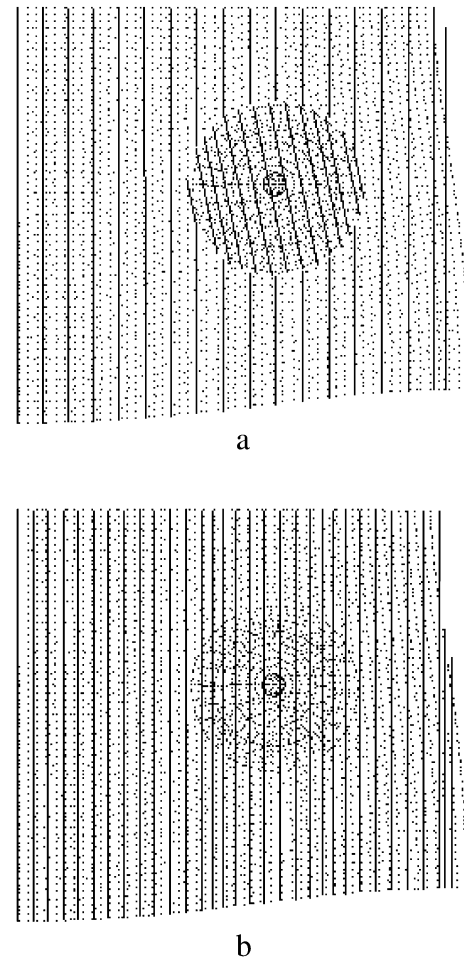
shows the generated tool paths for the two distinct machining areas. For the complex machining area within the elliptical boundary, the maximum gouge-free cutter size was calculated as 4.941 mm. From the standard commercial cutter series, a 3/16 in (4.763 mm) ball-end mill was selected to machine the isolated complex machining area. The given 1/2 in (12.7 mm) ball-end mill was used to machine the rest of the surface area outside the elliptical boundary.
